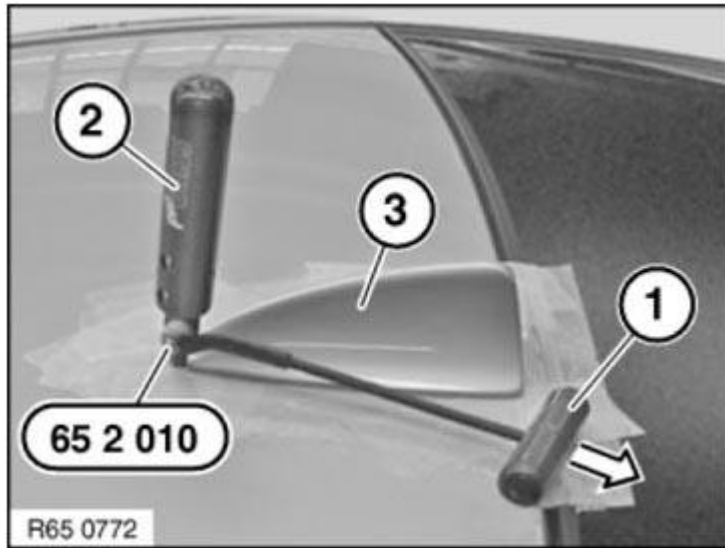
Cutting Adhesive Bead Using Special Tool 65 2 010
